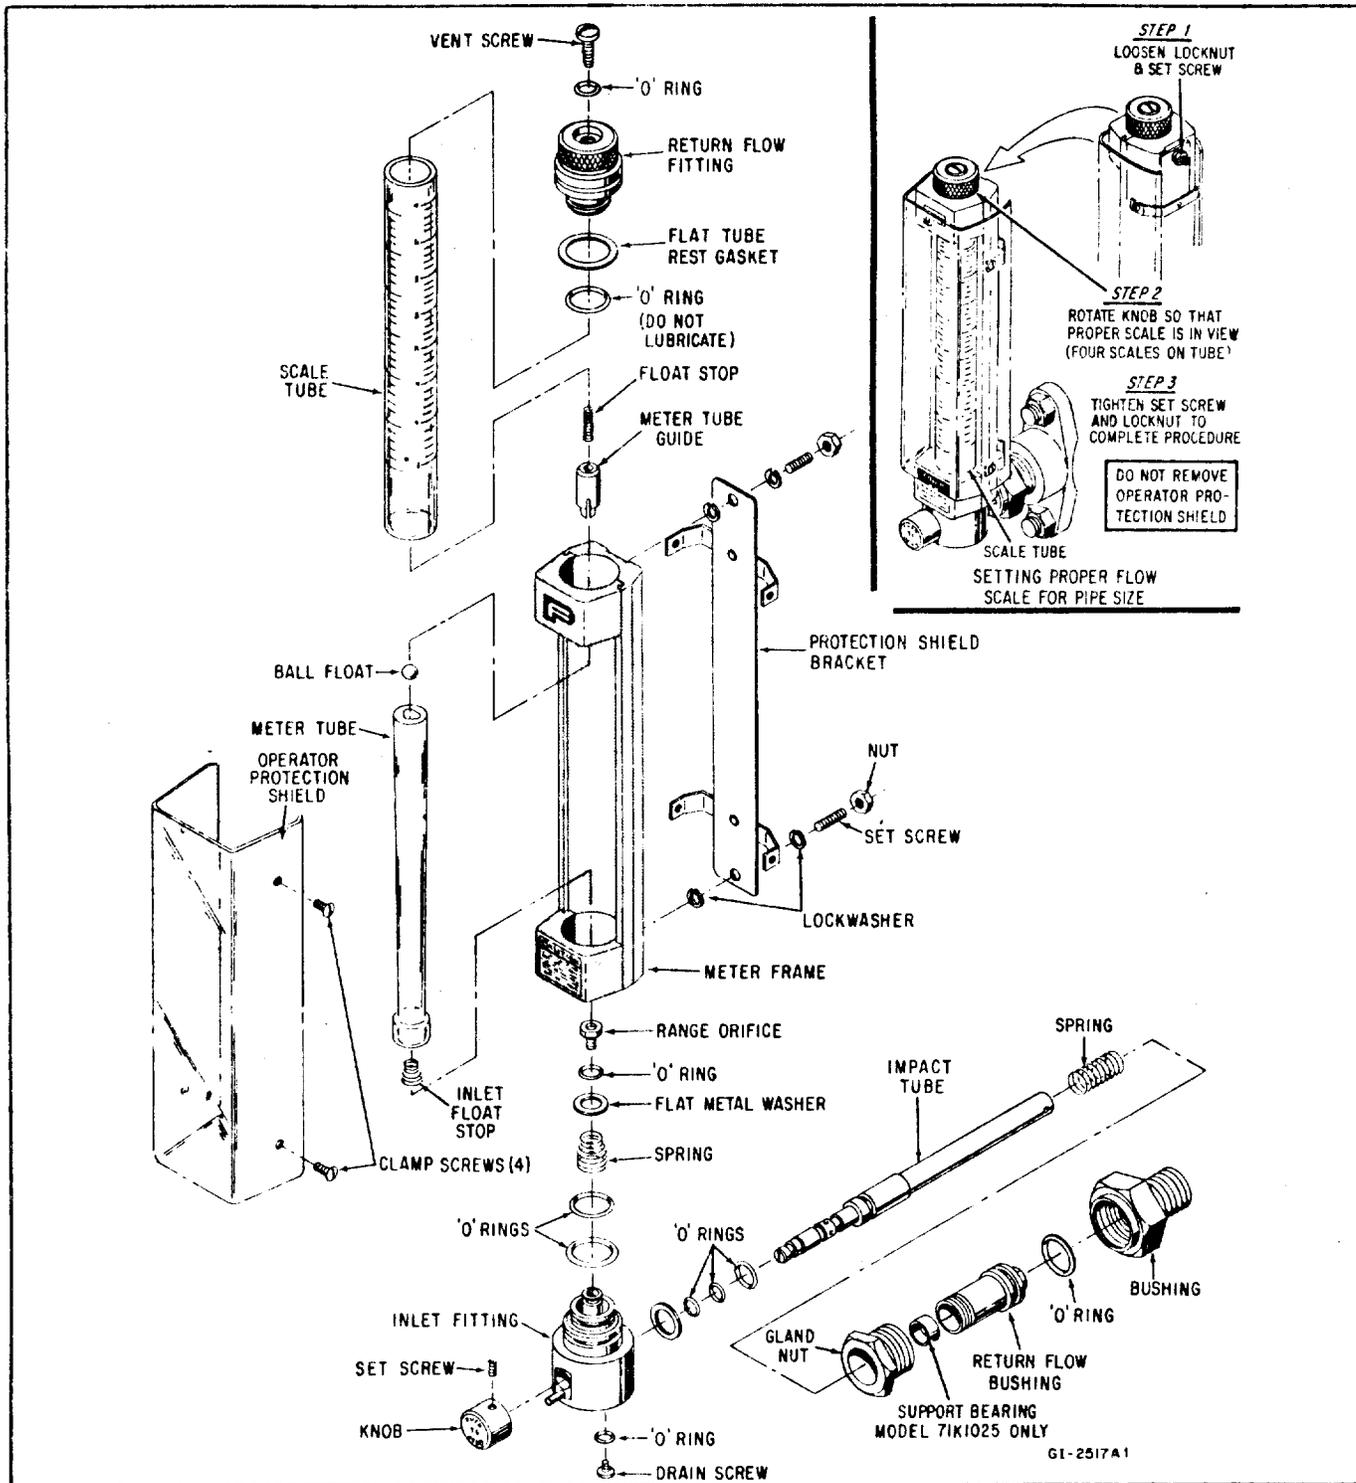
EXPLODED VIEW OF FLOW INDICATOR
